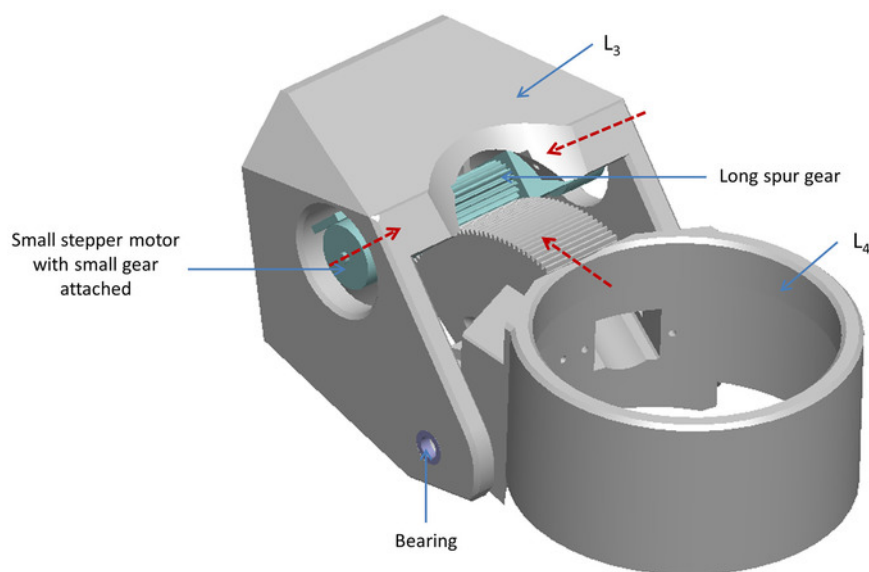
Assembly instruction for J<sub>2</sub>. The required links, motors, gears, ball-spring pairs, and bearings are shown, with some structures changed to transparent to illustrate the assembly. [Please click here to view a larger version of this figure.](#)
